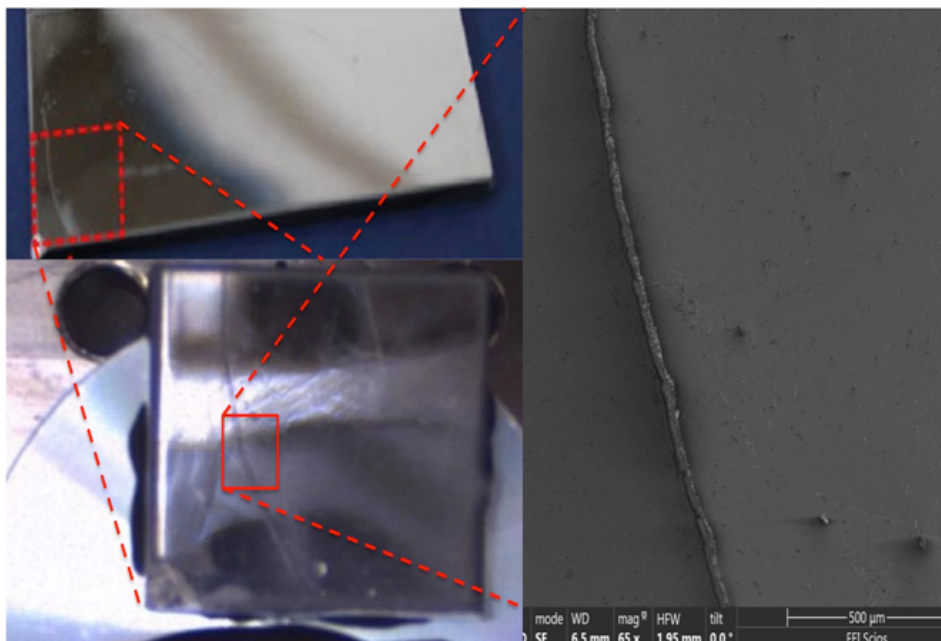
Groove defect on the injection molded BMG slab analyzed using Dual Beam SE Microscopy
